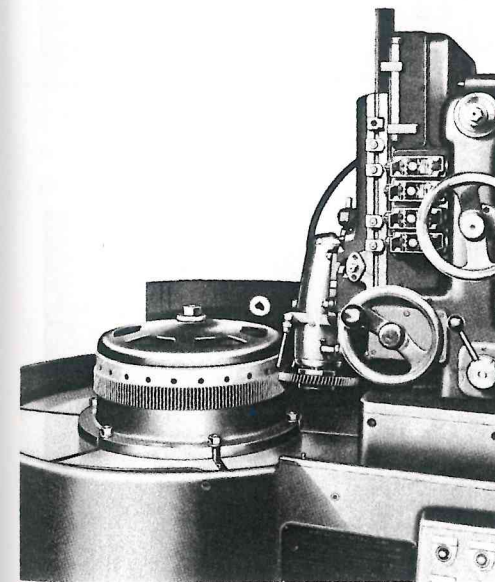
Shaving cutter machine. (Courtesy of National Broach and Machine Division of Lear Siegler, Detroit.)
